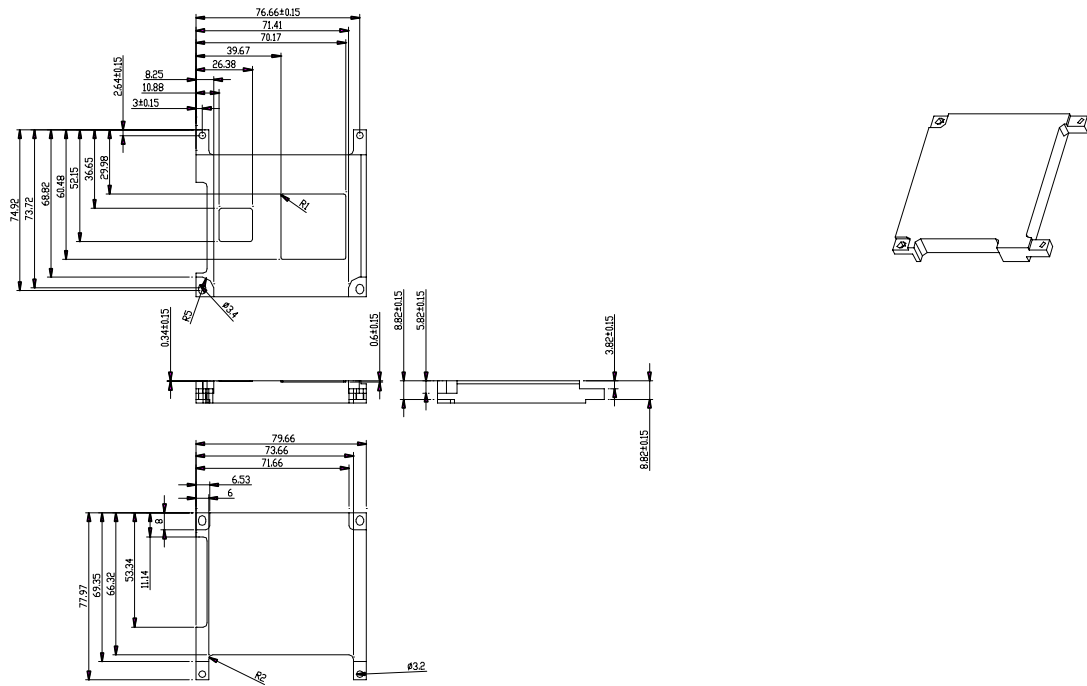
PCM-3362 optional Heatspreader Mechanical Drawing
